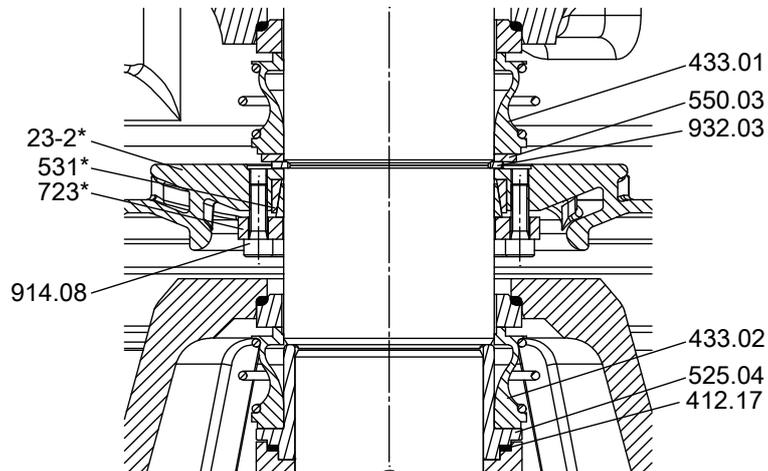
Mechanical seal for motors: 35 4...110 4, 32 6...100 6, 26 8...75 8
